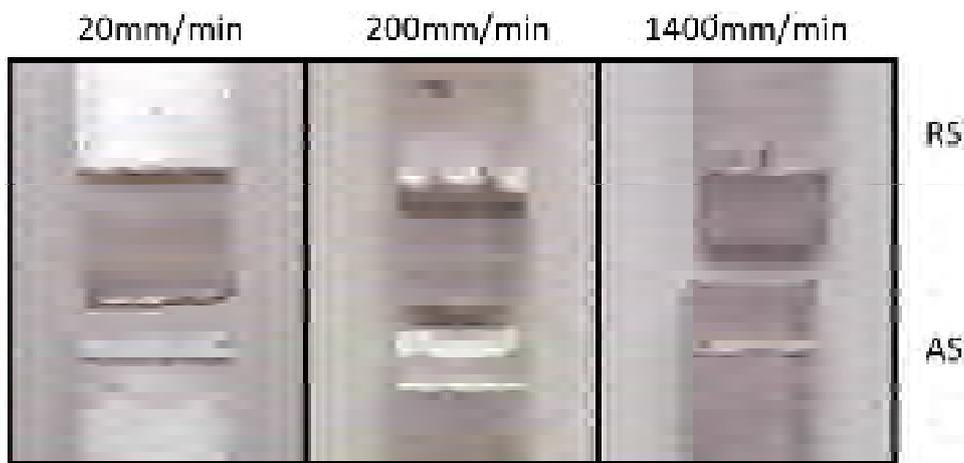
fracture appearance for FSW of extruded AZ31 for 20; 200 and 1400 mm/min at constant rotational speed.
